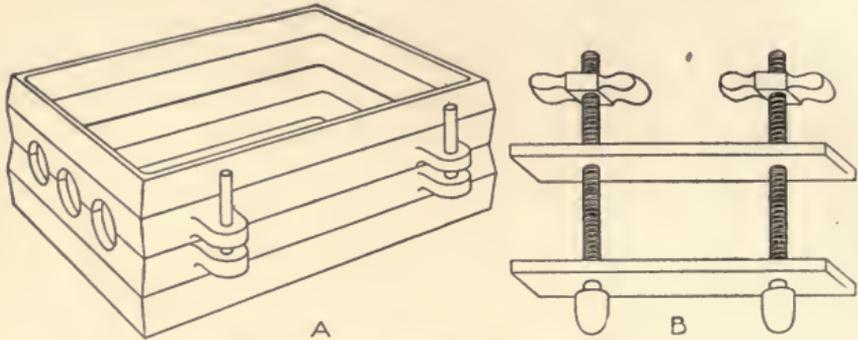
(A) Flask for Brass.—(B) Screw Clamp.
